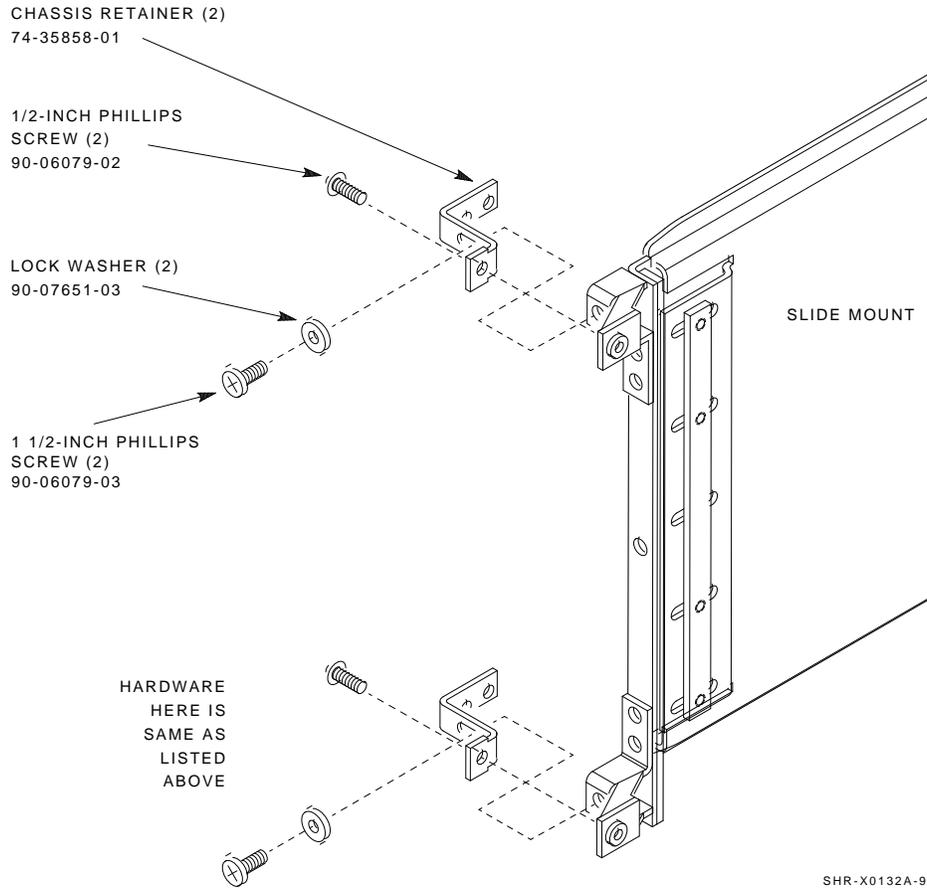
Securing the SF72 to the Weldment Brackets
